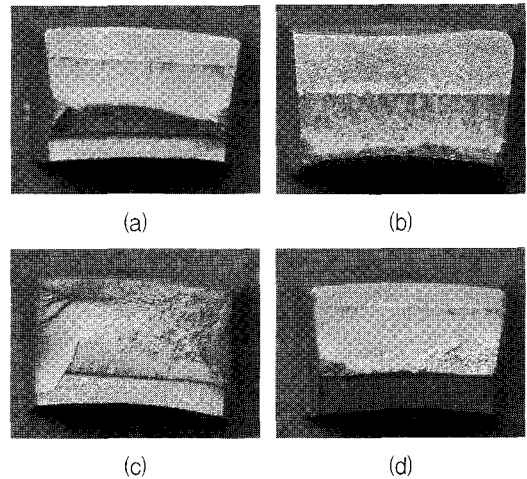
Photographs of fracture surface resulted from different notch condition
